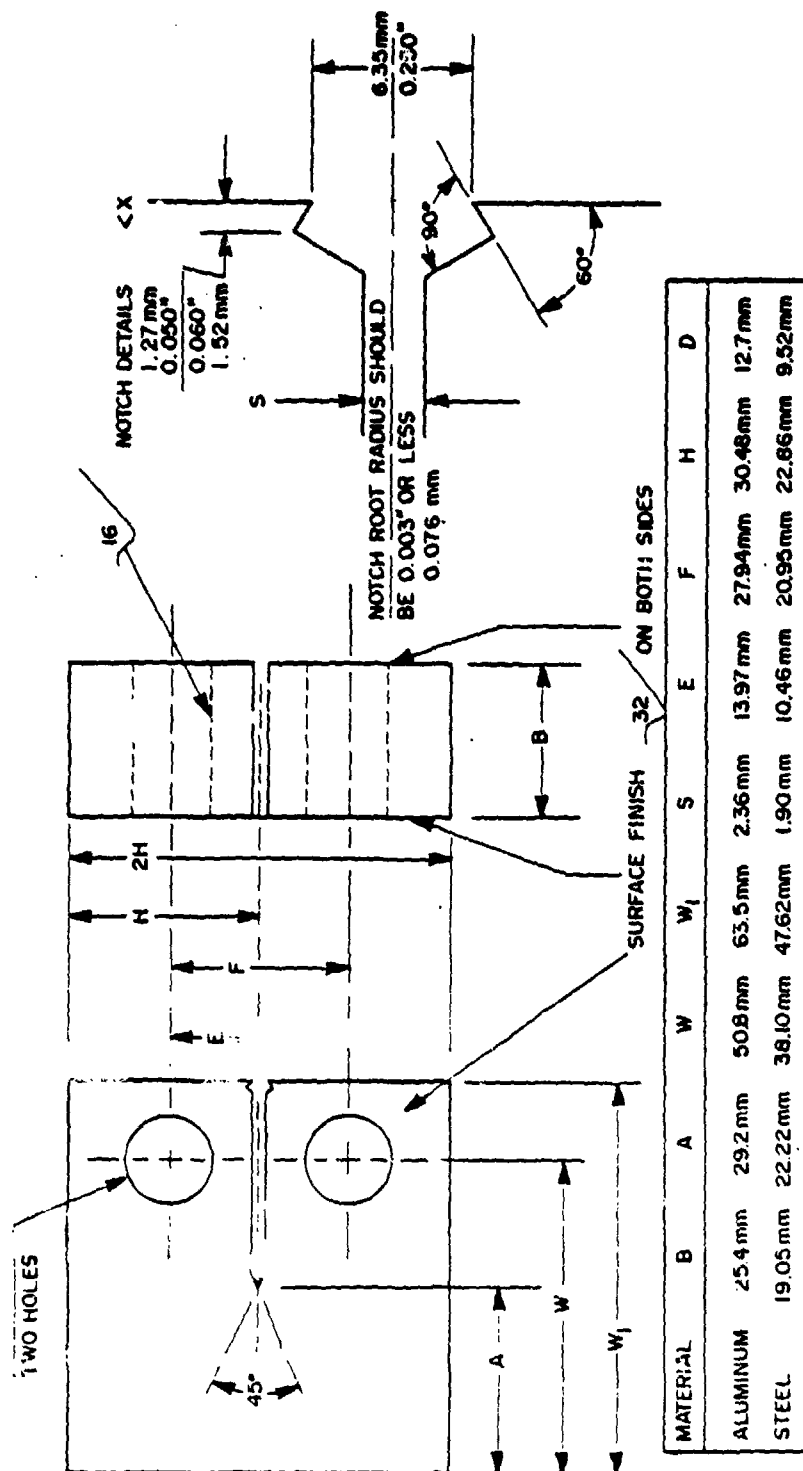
Compact-Tension Plane-Strain Fracture-Toughness Specimen.
